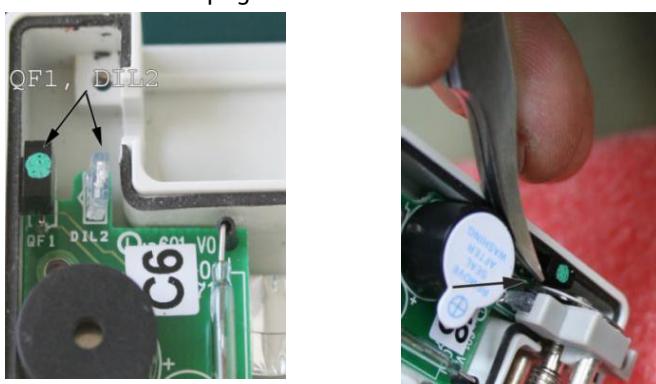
QF1 and DIL2 (Left) – Verifying That the Encoder Moves Easily (Right) Note: If a new PCB was assembled, remove the seal from the buzzer.
